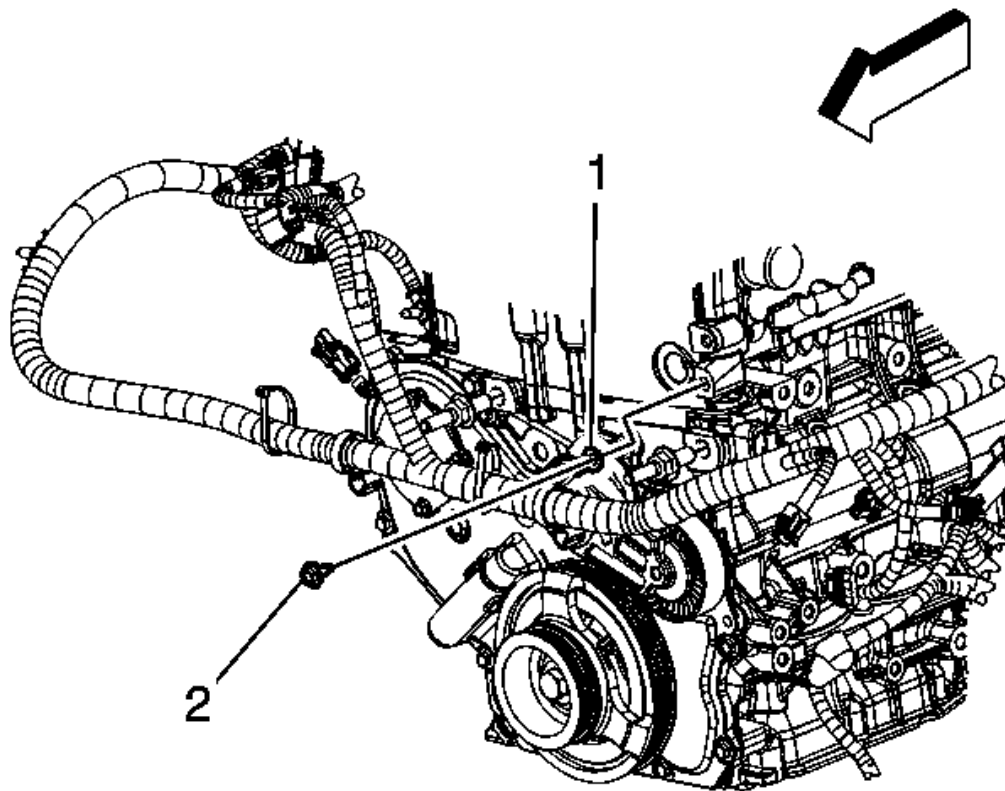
Identifying Engine Wiring Harness Ground Terminal
